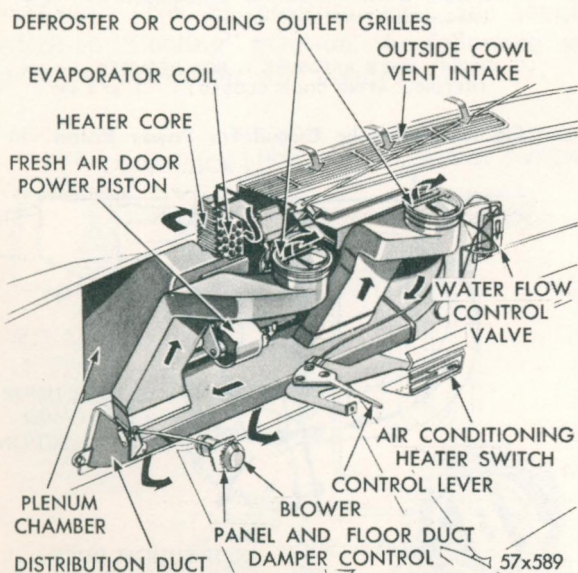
Heater-Air Conditioning (Schematic Drawing Engine Compartment Installation)
